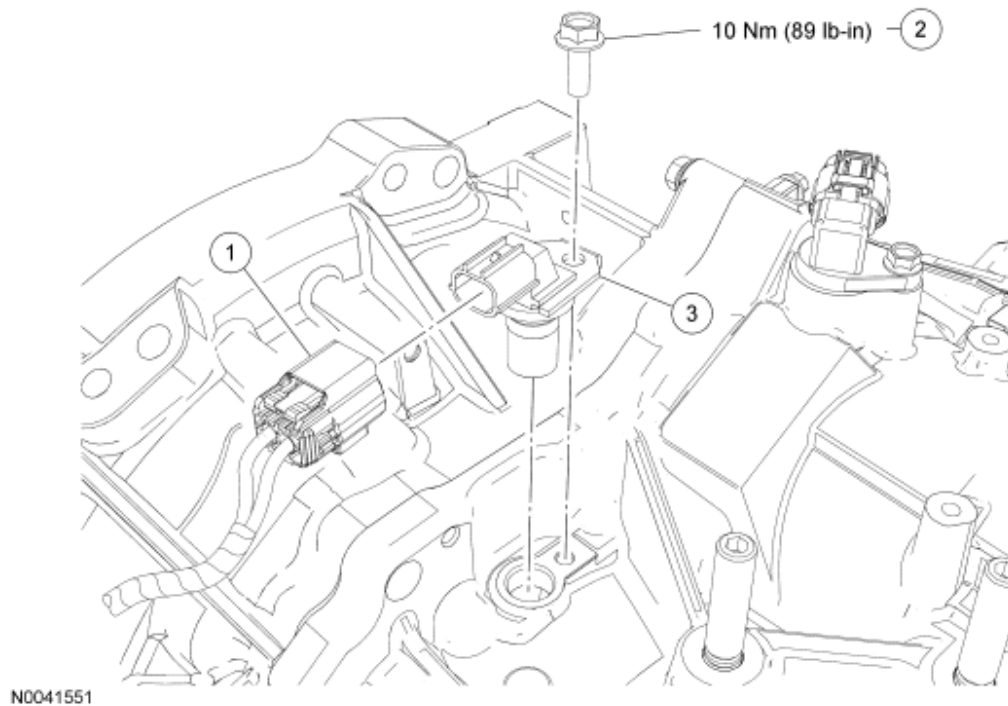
Exploded View Of Turbine Shaft Speed (TSS) Sensor With Torque Specification
